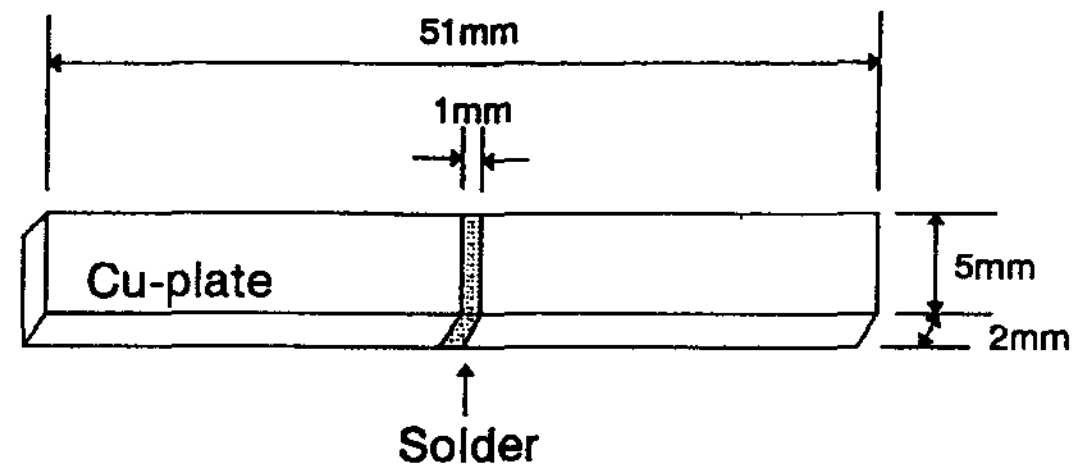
Shape of tensile specimen to test the strength of solder joint.
